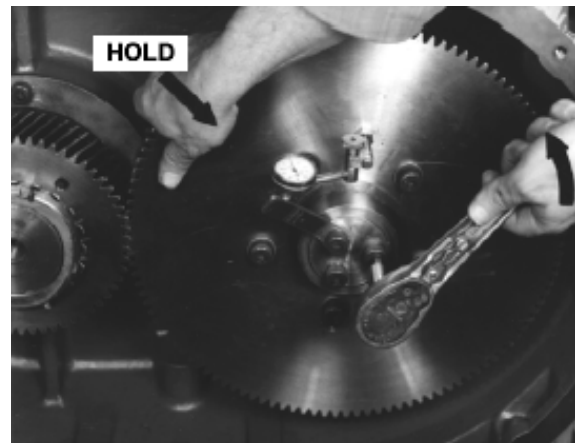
HOLD GEAR & SHAFT FROM TURNING TIGHTEN FIVE GEAR TO HUB
